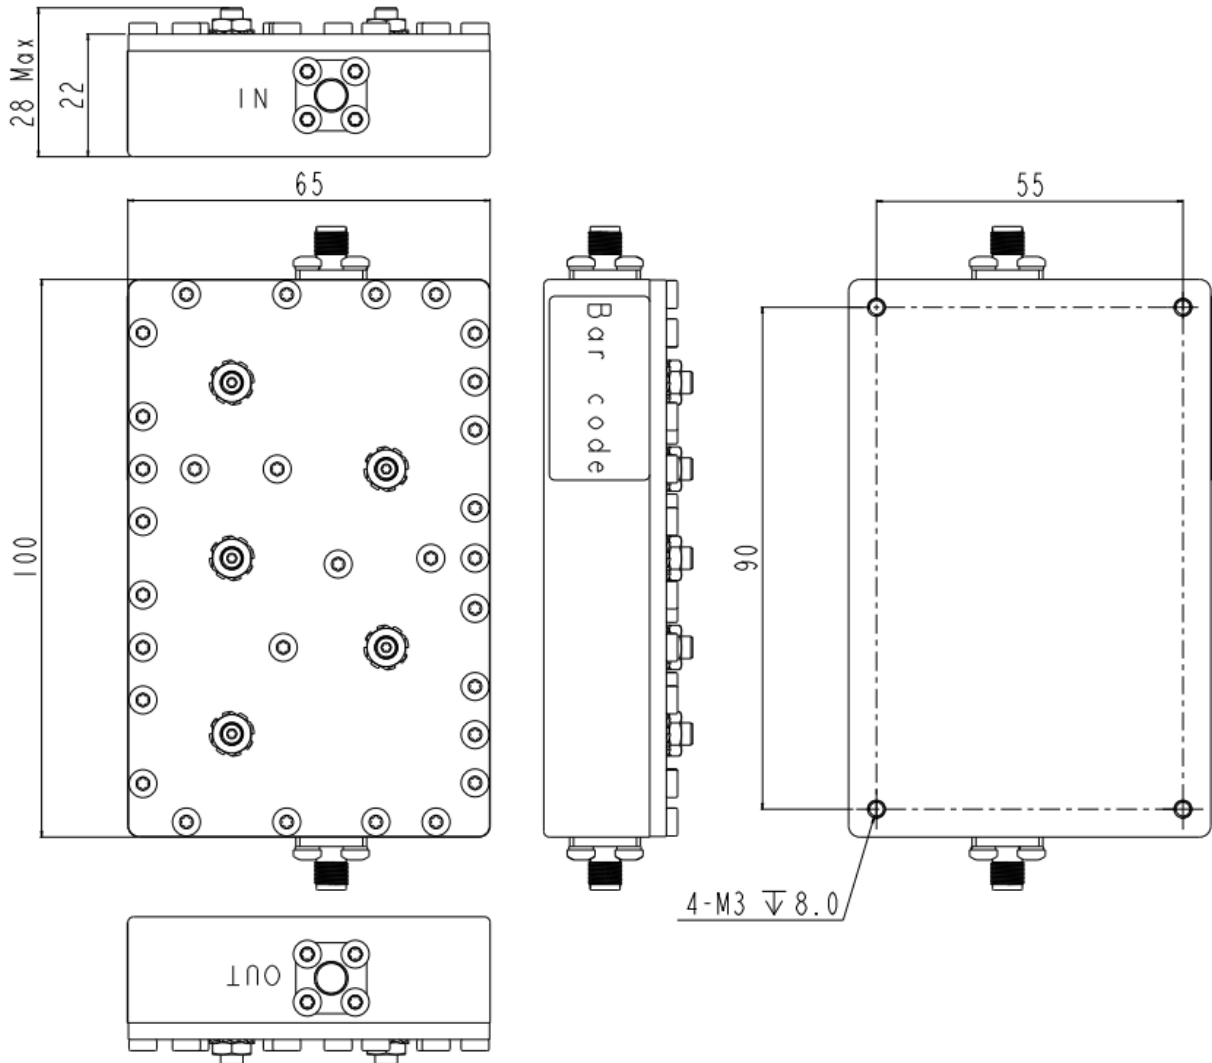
JX-CF1-4967M5012M-70S front panel layout
